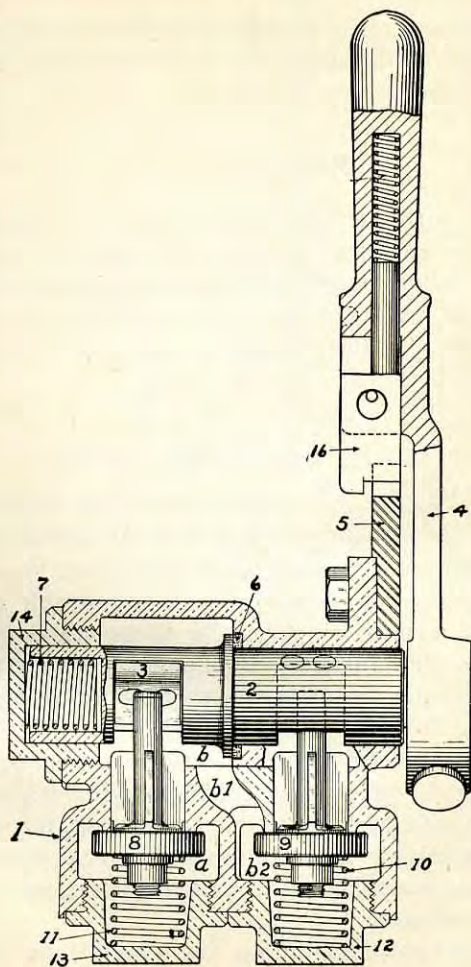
Straight-Air Brake Valve. Lap Position. Side View.
